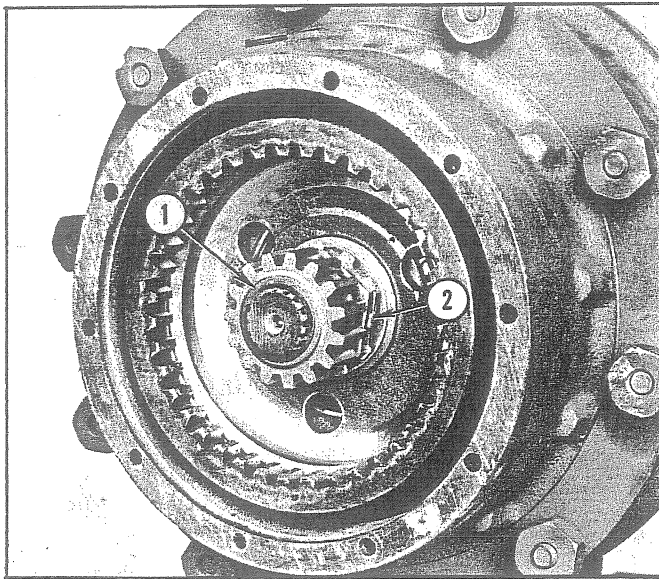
View Showing Sun Gear and Lock on Spindle Nuts
